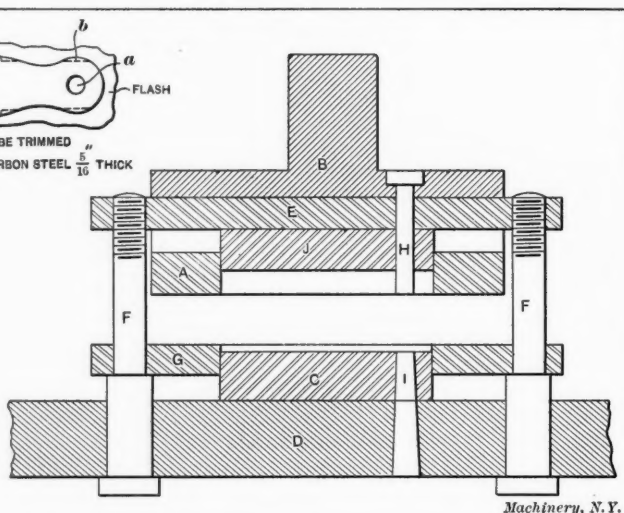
Sectional View showing Method of Applying Stripper-plates to the Punch and Die
